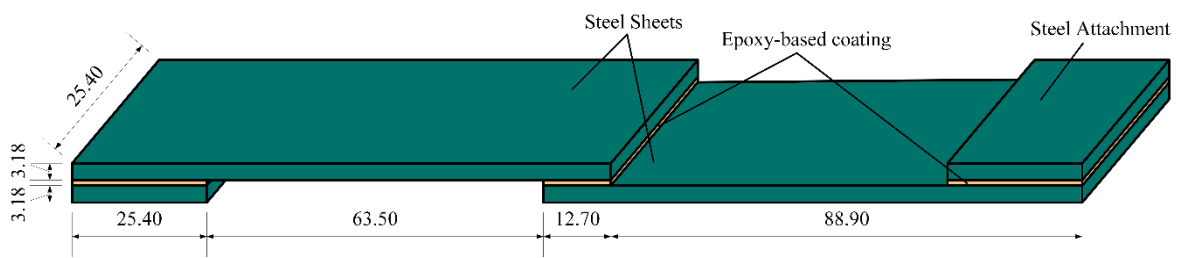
The detailed SLS specimen configuration (Unit: mm)
